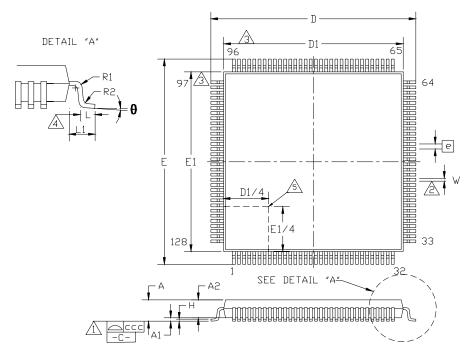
USB2227/USB2228 128-Pin VTQFP Package Outline
